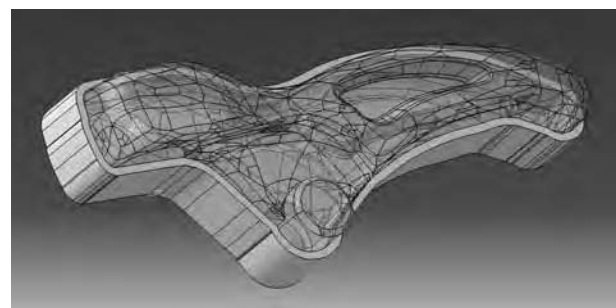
Obtaining the molds from the modified CAD model using PD and GSD module in CATIA
